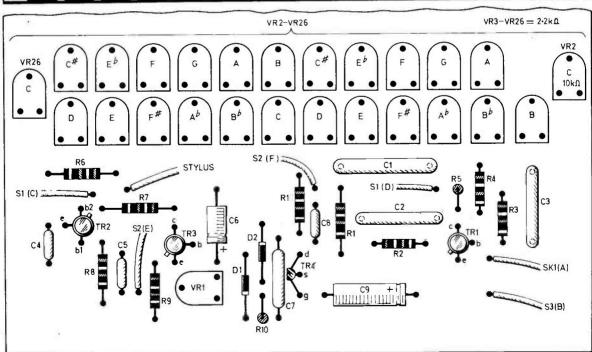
Layout and wiring of the p.c.b. shown full size.
